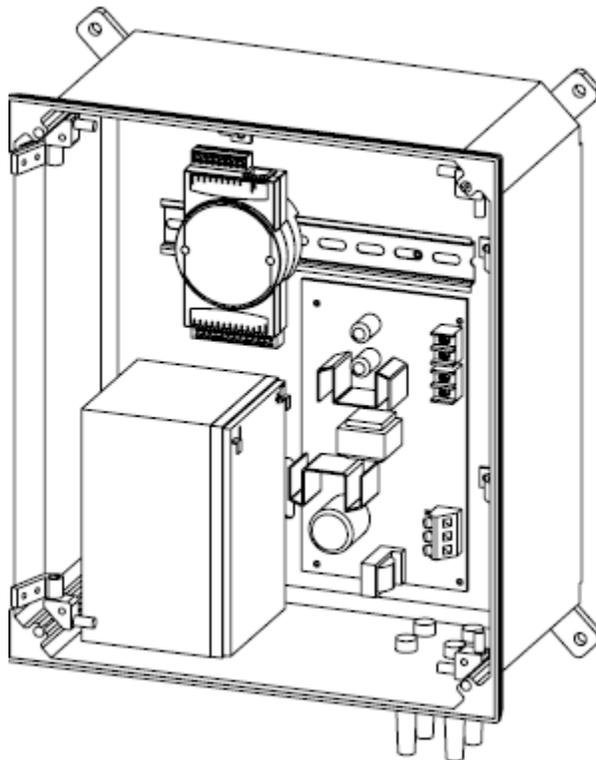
Standard Outdoor Enclosure and Battery Backup Configuration
